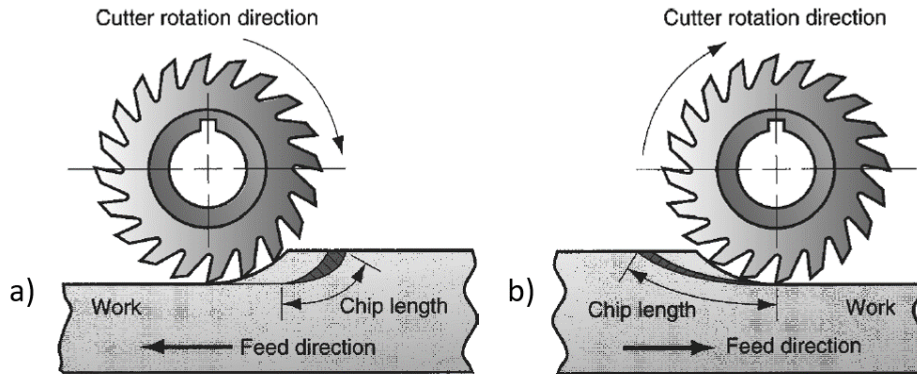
a) Down-milling; b) Up-milling, adapted from [5].
